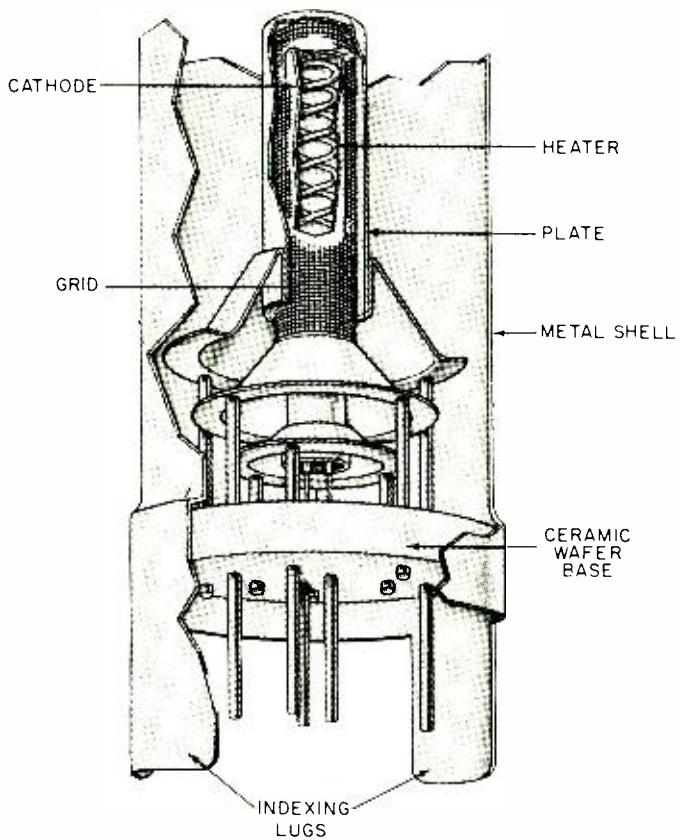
Cutaway view of a typical nuvistor miniature tube.
